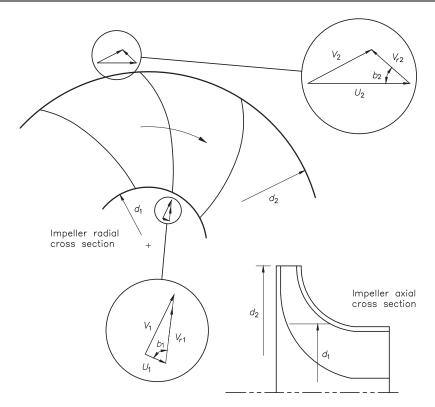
Impeller inlet and outlet flow vector triangles. Adjustments made to impeller, blade angle, inlet guide vane angle, diffuser size and shape, and so on are adjusted to obtain optimum performance under specific operating conditions.
